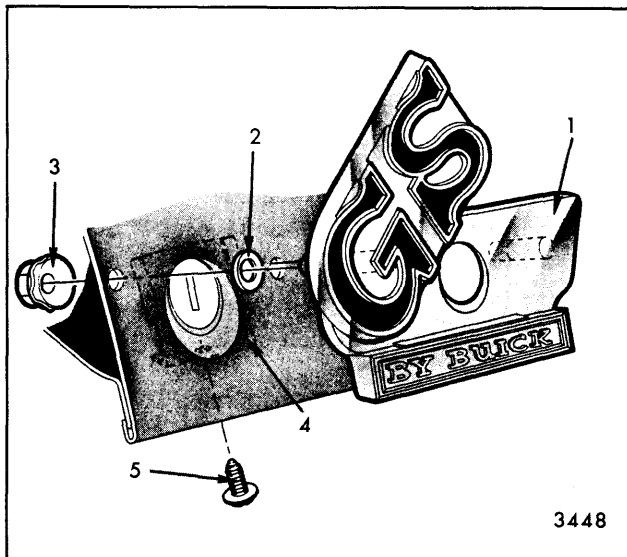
Lock Cylinder Emblem - Buick 43437, 44637 and 44667 Styles
